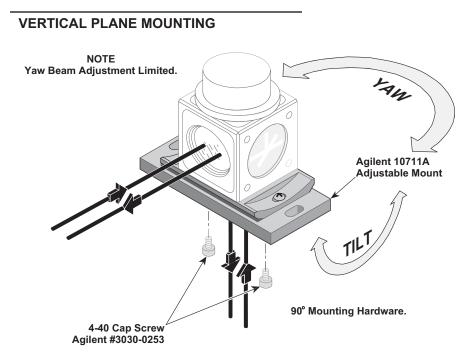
Vertical Plane Mounting Using the Agilent 10711A Adjustable Mount
